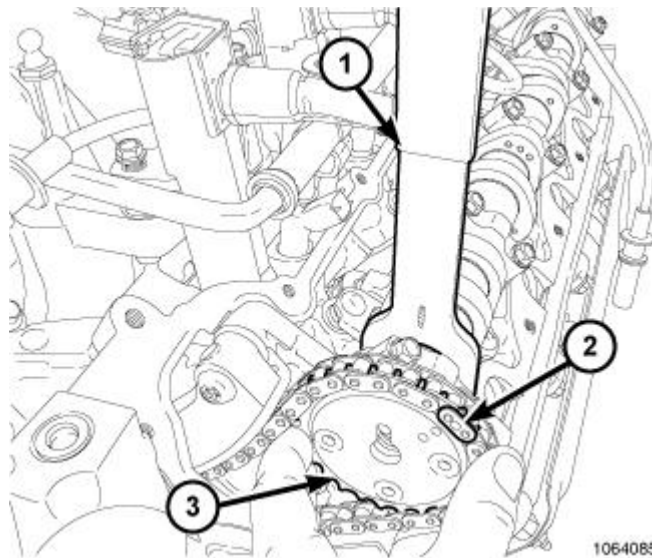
Removing/Installing Camshaft Holder On Camshaft
